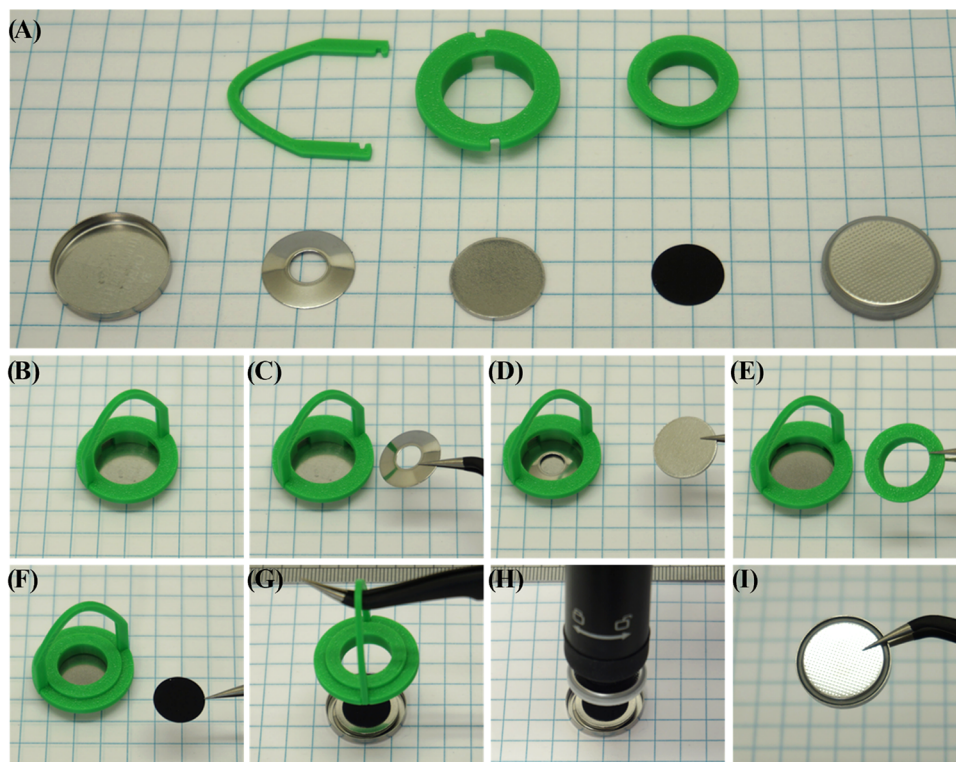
Depiction of CR2032 coin cell assembly using the two-piece alignment device and suction cup. (A) Components used in the coin cell assembly process, including (top row) two-piece alignment device with handle and (bottom row, left to right) cathode case, spring, spacer, cathode, and top assembly. The assembly process was completed with (B) installing the alignment tool in the positive case followed by inserting the (C) spring, (D) spacer, (E) cathode aligner insert, and (F) cathode. (G) Removal of the alignment device using the attached handle, followed by dispensing electrolyte and (H) placement of the top assembly using a suction pen to yield a (I) well-aligned coin cell assembly ready to be crimped.
